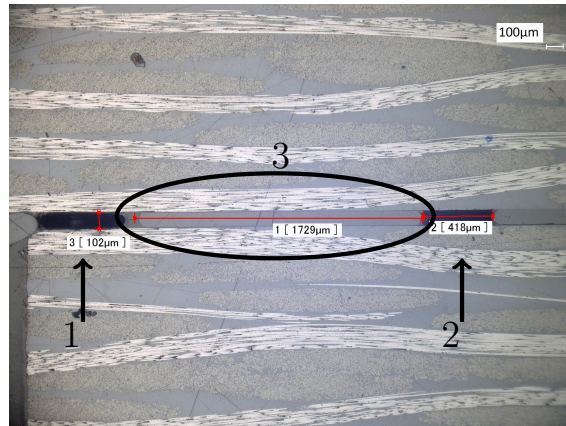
Fracture surface of the weld with Attached ED and CF/PPS substrate welded at a displacement of 0.05 mm, stopped before the displacement plateau was reached. The weld parameters are similar as in table 2.2, only the consolidation phase is not applied.
